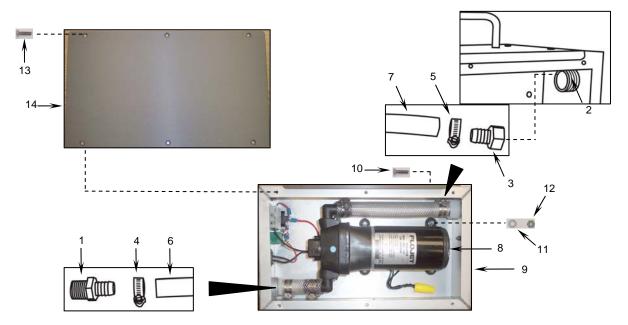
Installing the Sink Fill Pump Assembly Internal Straight Adapters.
